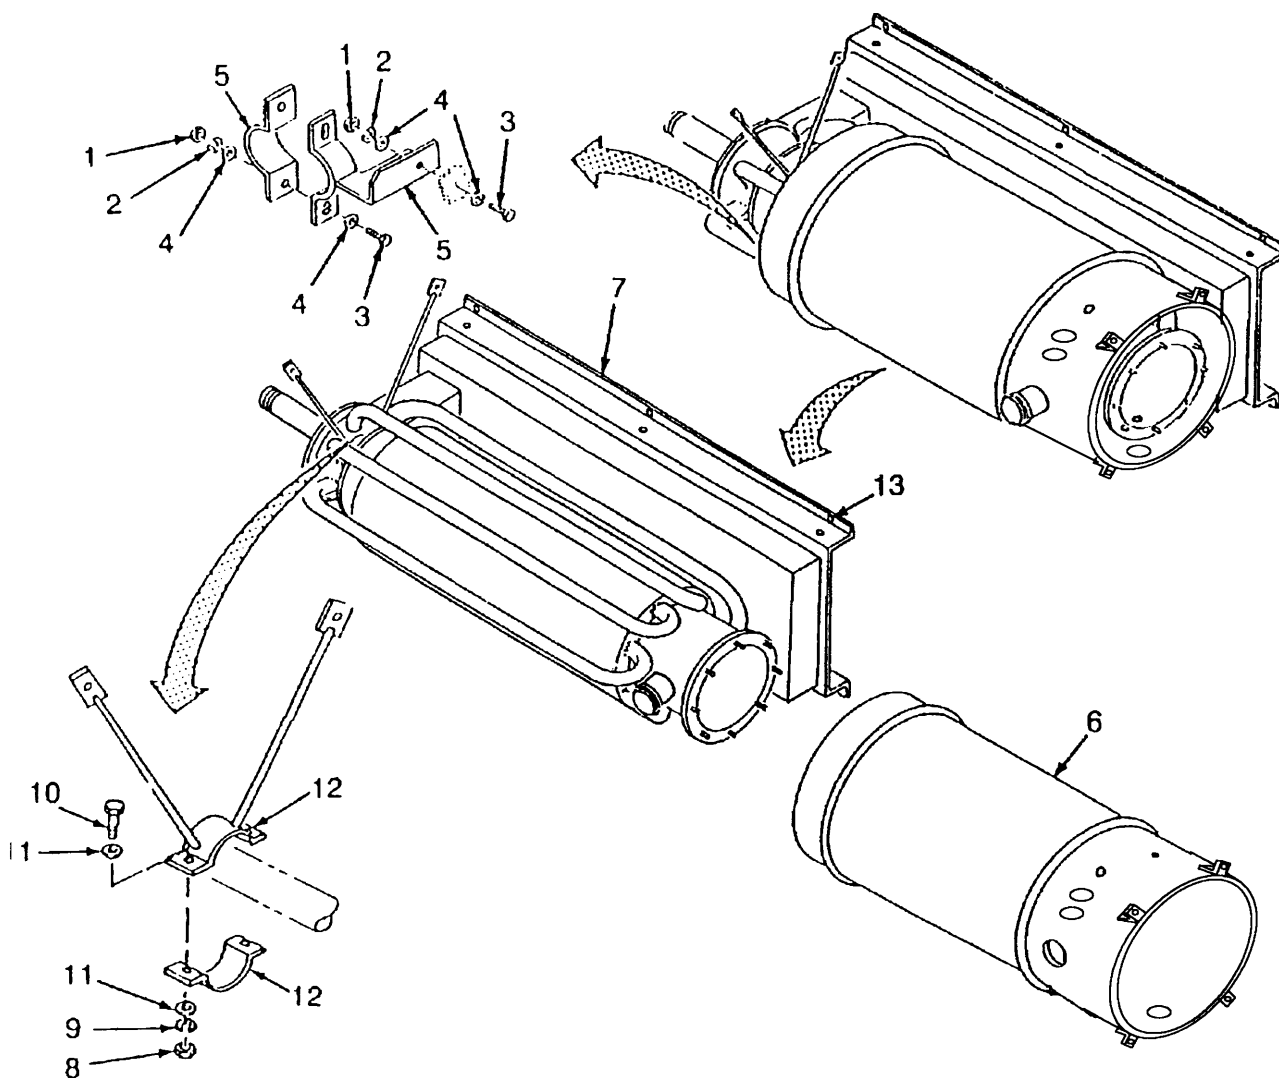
Heat Exchanger, (Model H120-1) Disassembly
